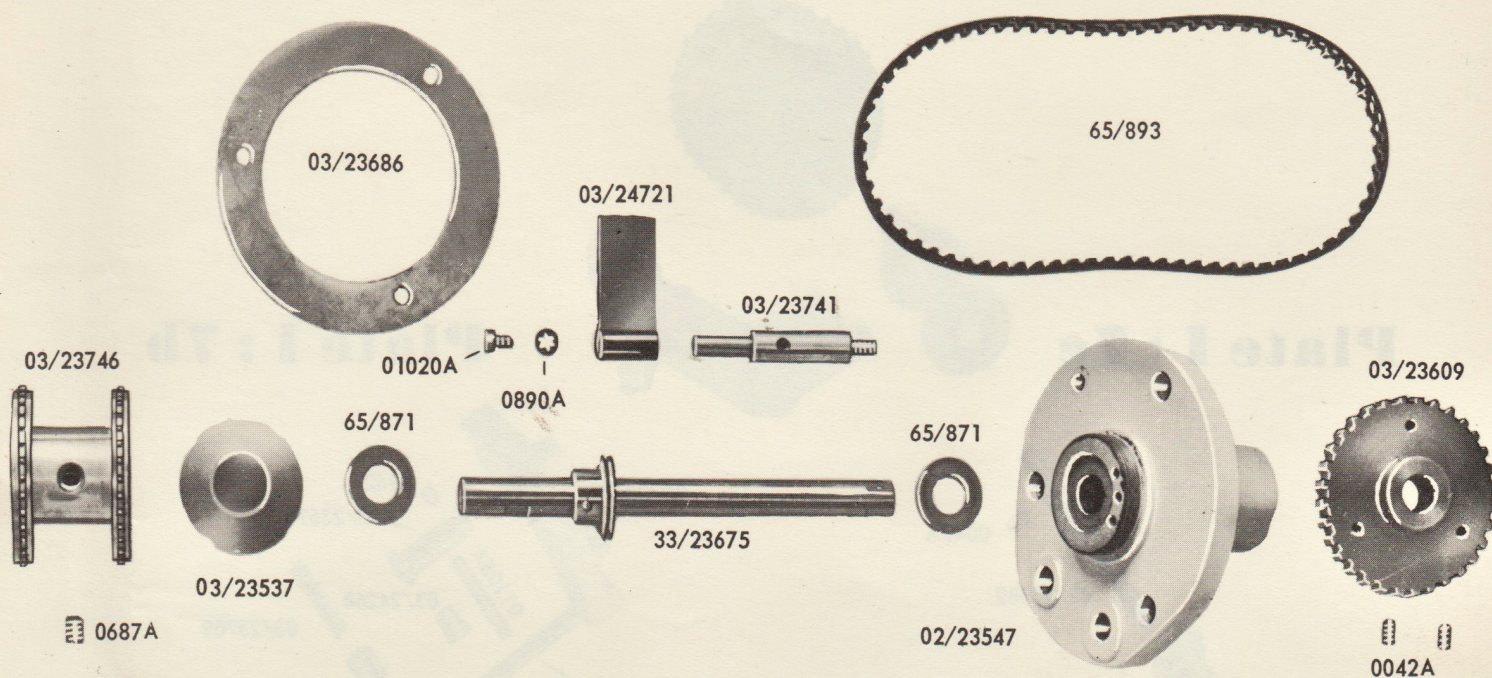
TOP SPROCKET BEARING ASSEMBLY
